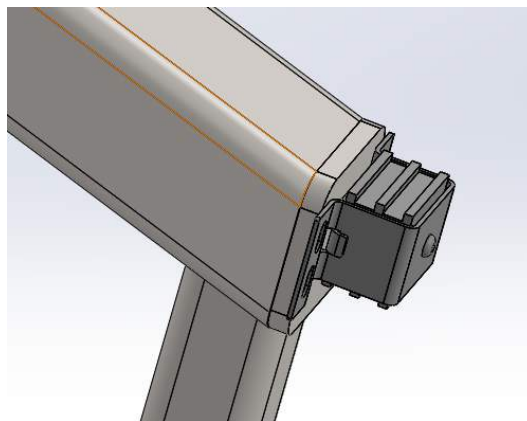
Solidworks model of the magnetic latch attachment to the end cap.
